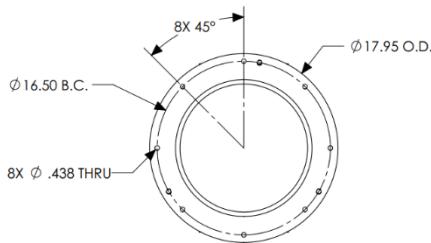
Model 2400-FTS Quad Helix Dimensional Drawings
